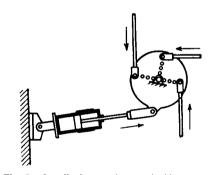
A spring reduces the thrust at the end of the stroke.
